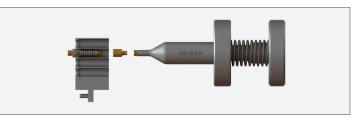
Bullet Installation to Contact. Uses Tool PN 500-38-004.
